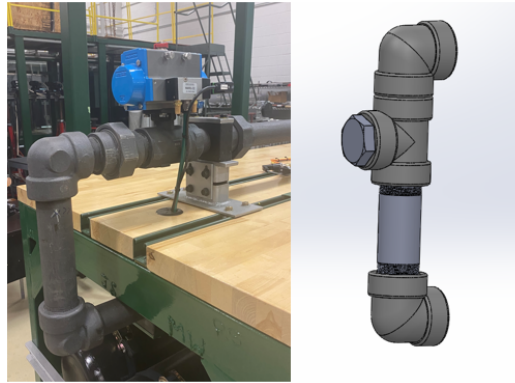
Old manifold (left) and Manifold addition design (right)
